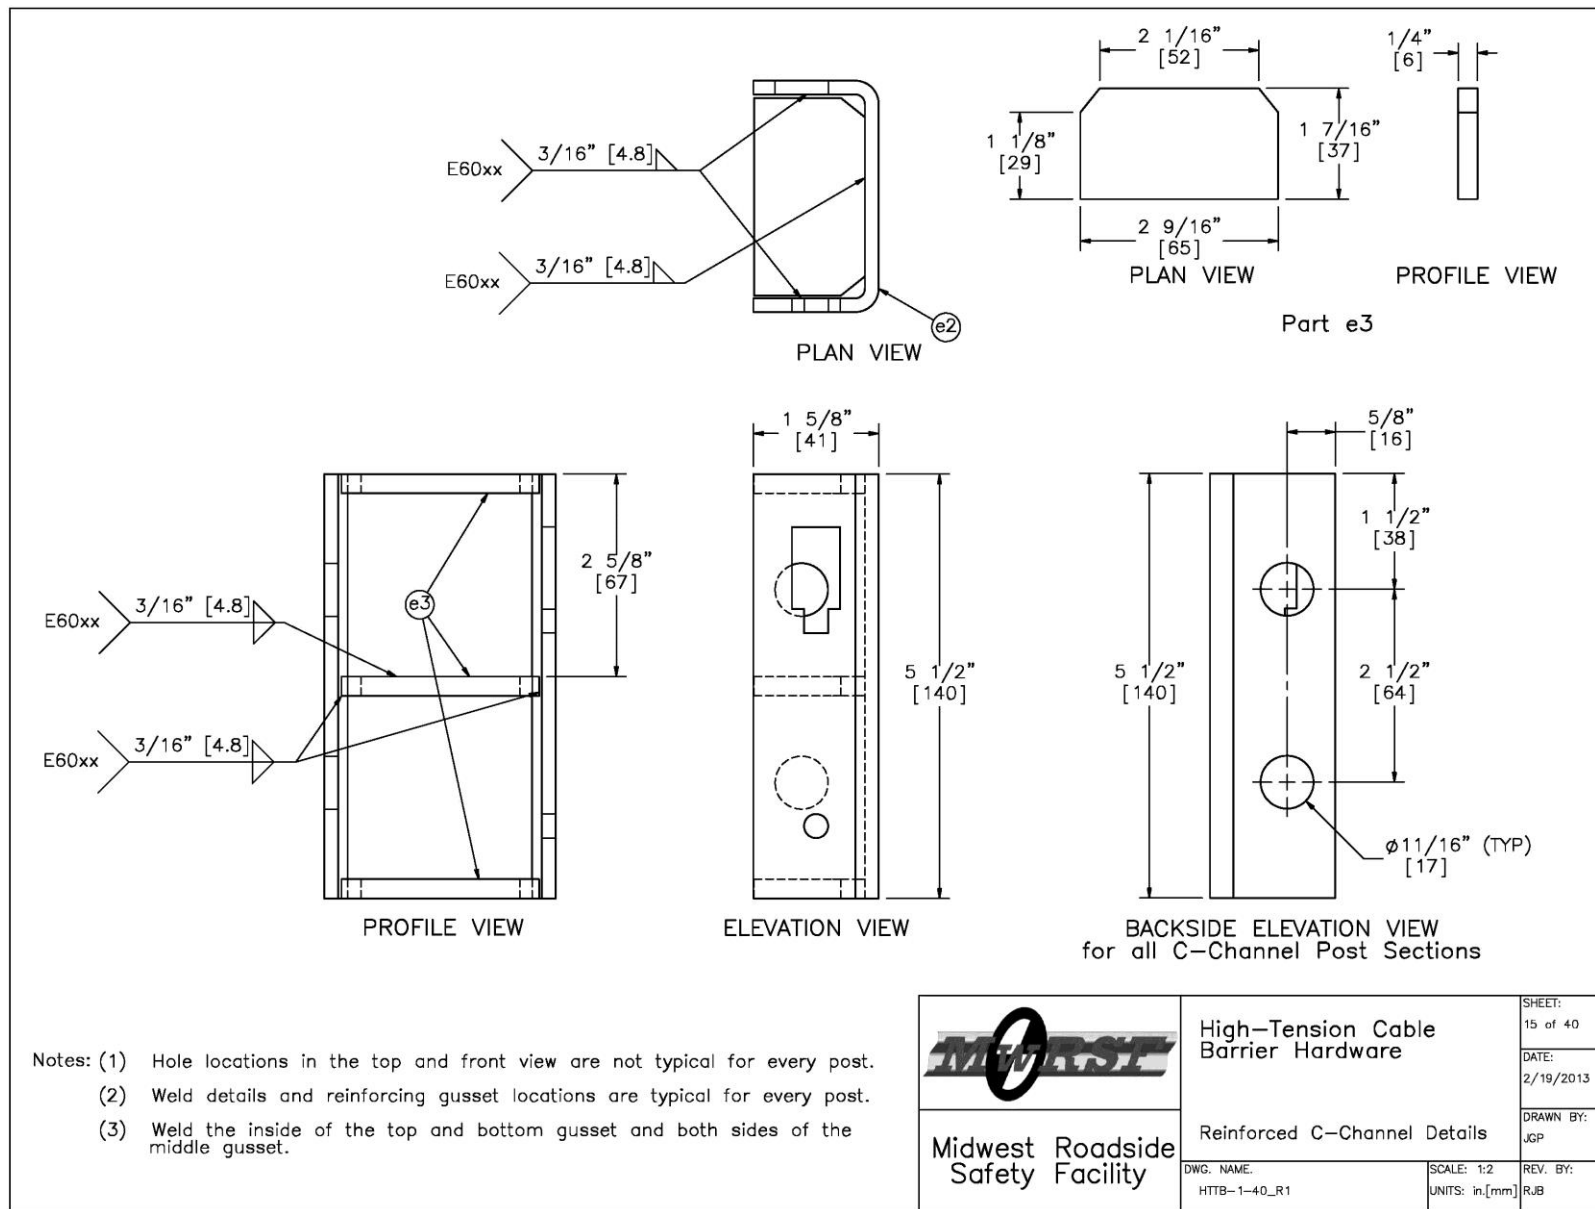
Reinforced C-Section Details, Test Nos. HTTB-1 through HTTB-40
